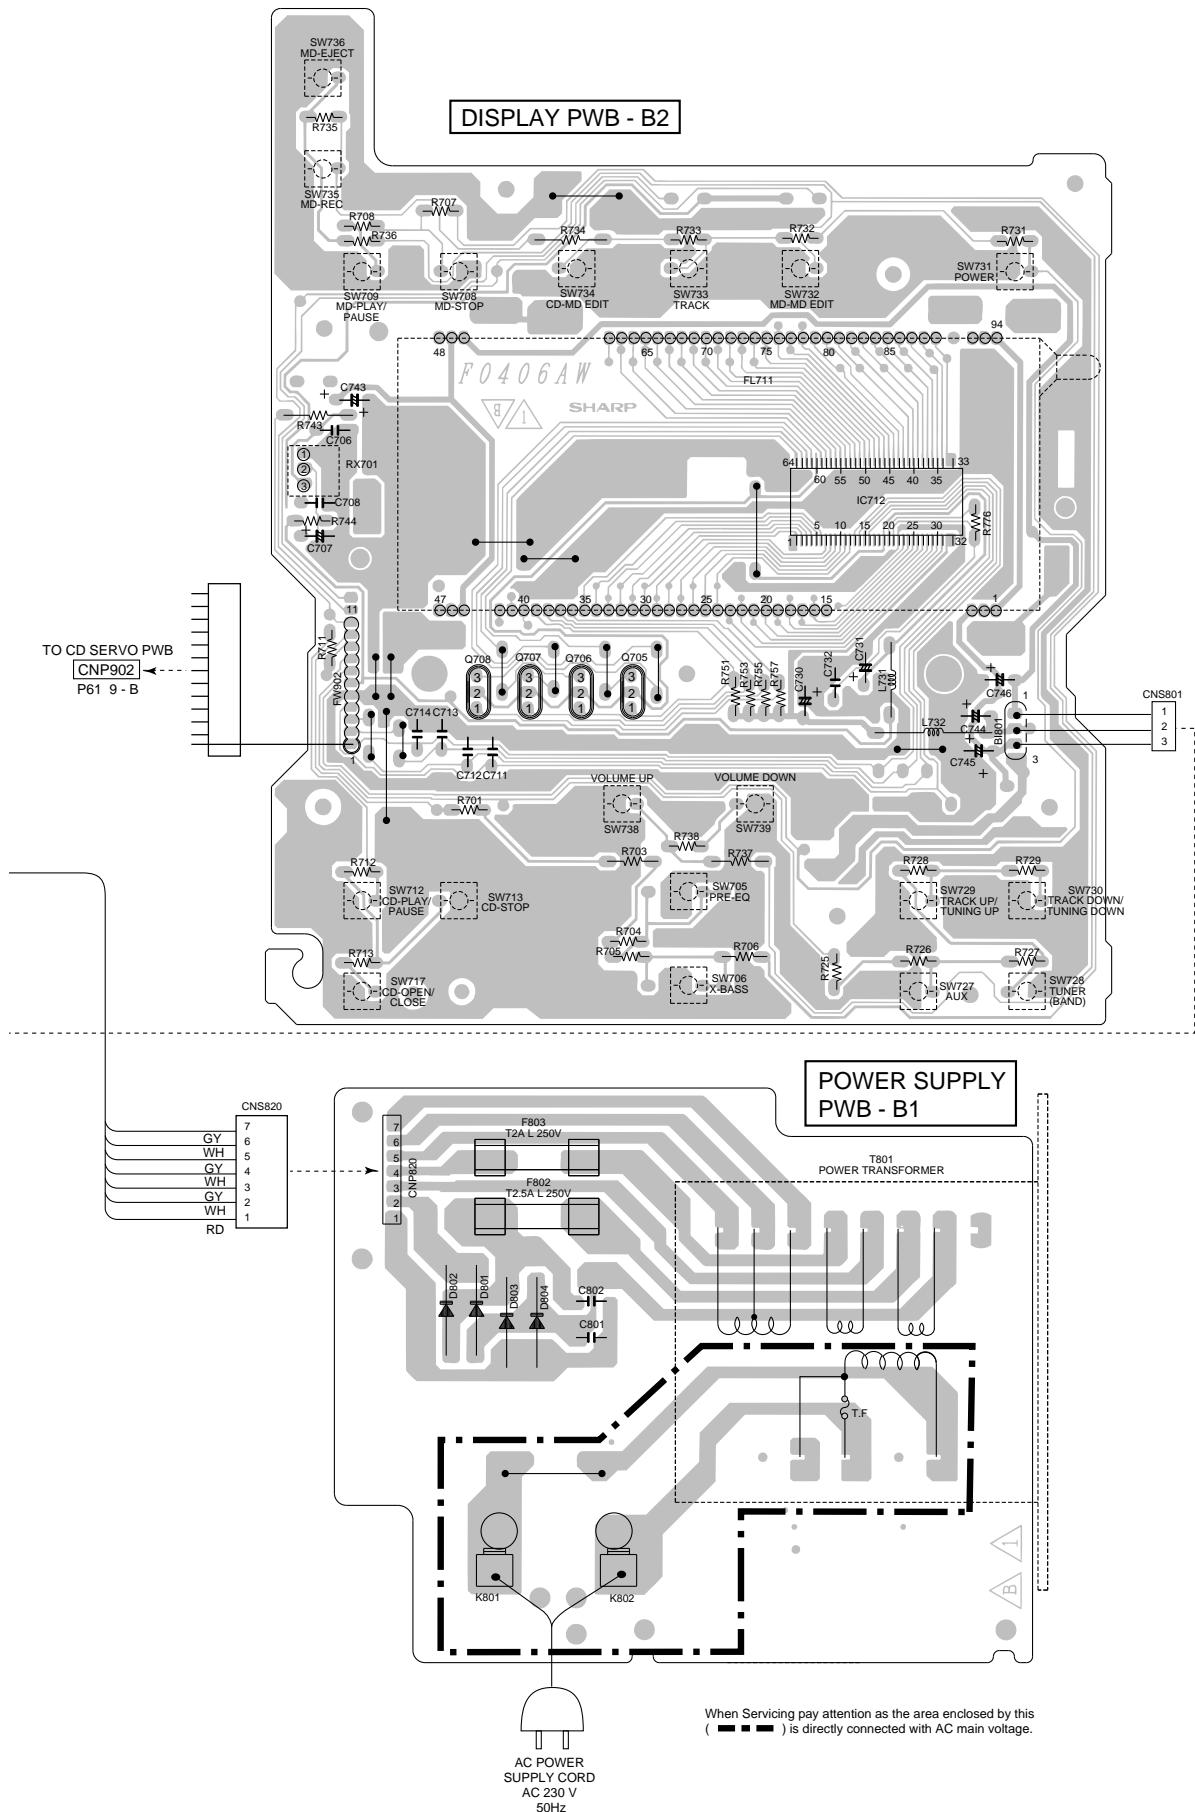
WIRING SIDE OF P.W.BOARD (4/9)
